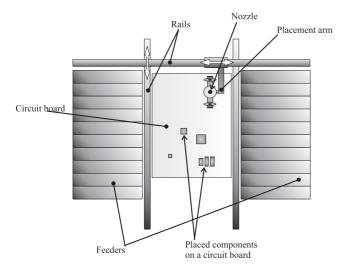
The structure of a gantry-type machine equipped with one placement arm as seen from above.
